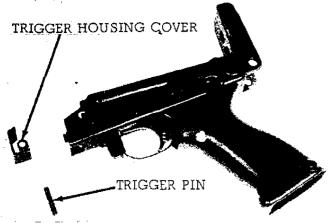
REMOVING THE TRIGGER HOUSING COVER
